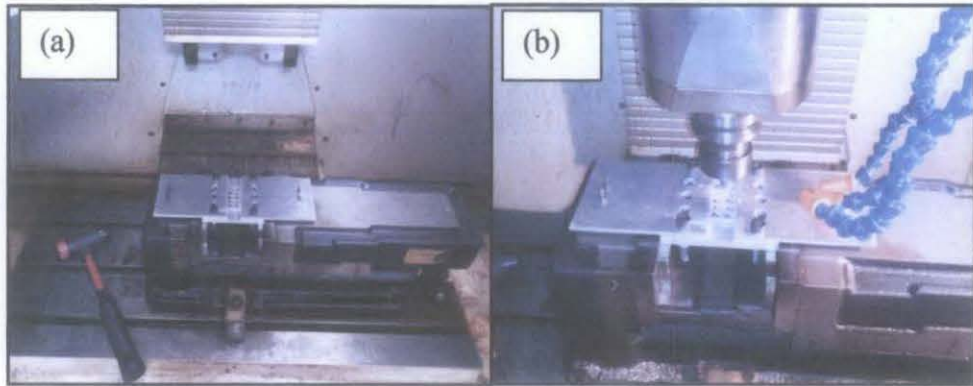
(a) Workpiece on clamp vice. (b) FSW of PP in progress.
